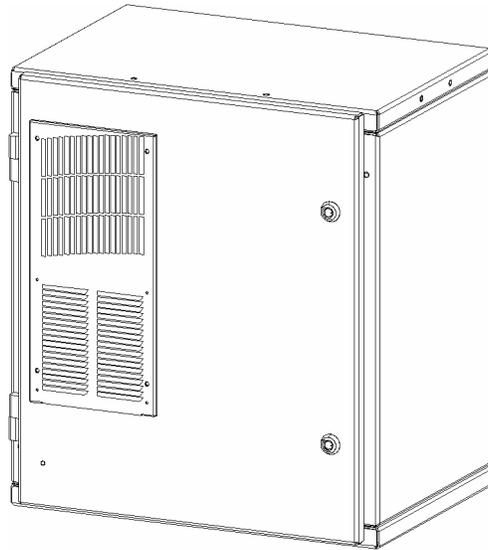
G18 with Recessed Air Conditioner – Front View
